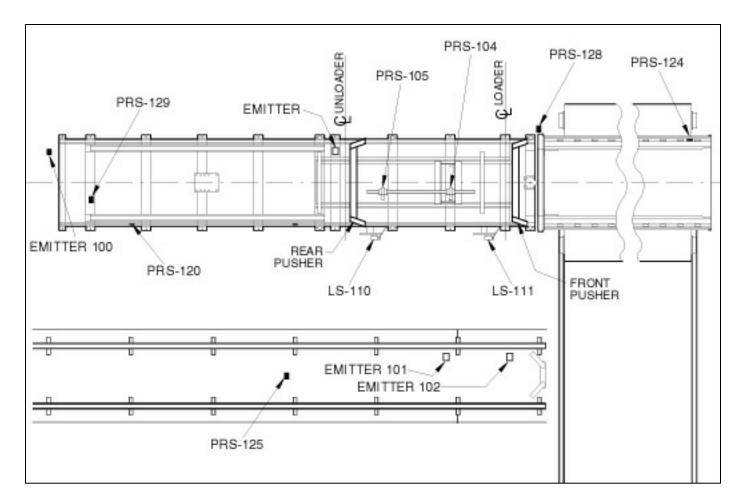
RACKVEYOR AND SIDE SHIFTER SWITCHES (UNLOADER SIDE SHIFTER).
